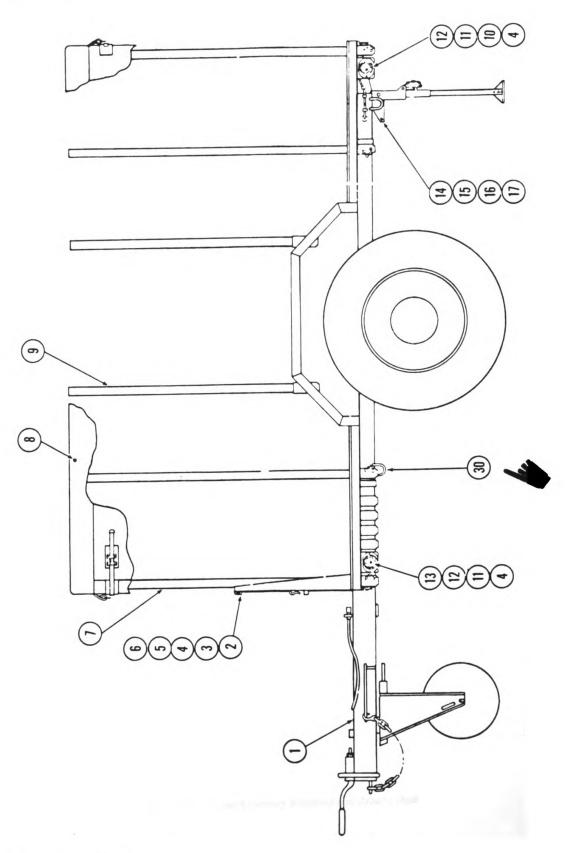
Trailer, Side, Top and Rear Views (Sheet 1 of 3)
